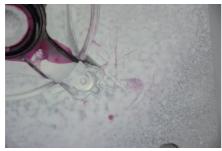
Detail of damage on surface of high pressure casting die after 800 000 working cycles.
